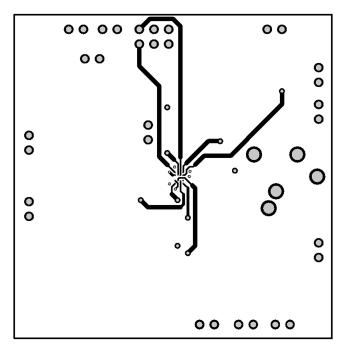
Recommended DSBGA PCB Layout: Inner Layer 1
